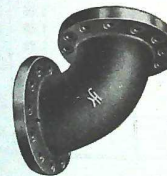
S Flanged Elbow Showing Bolt Holes Spot Faced
